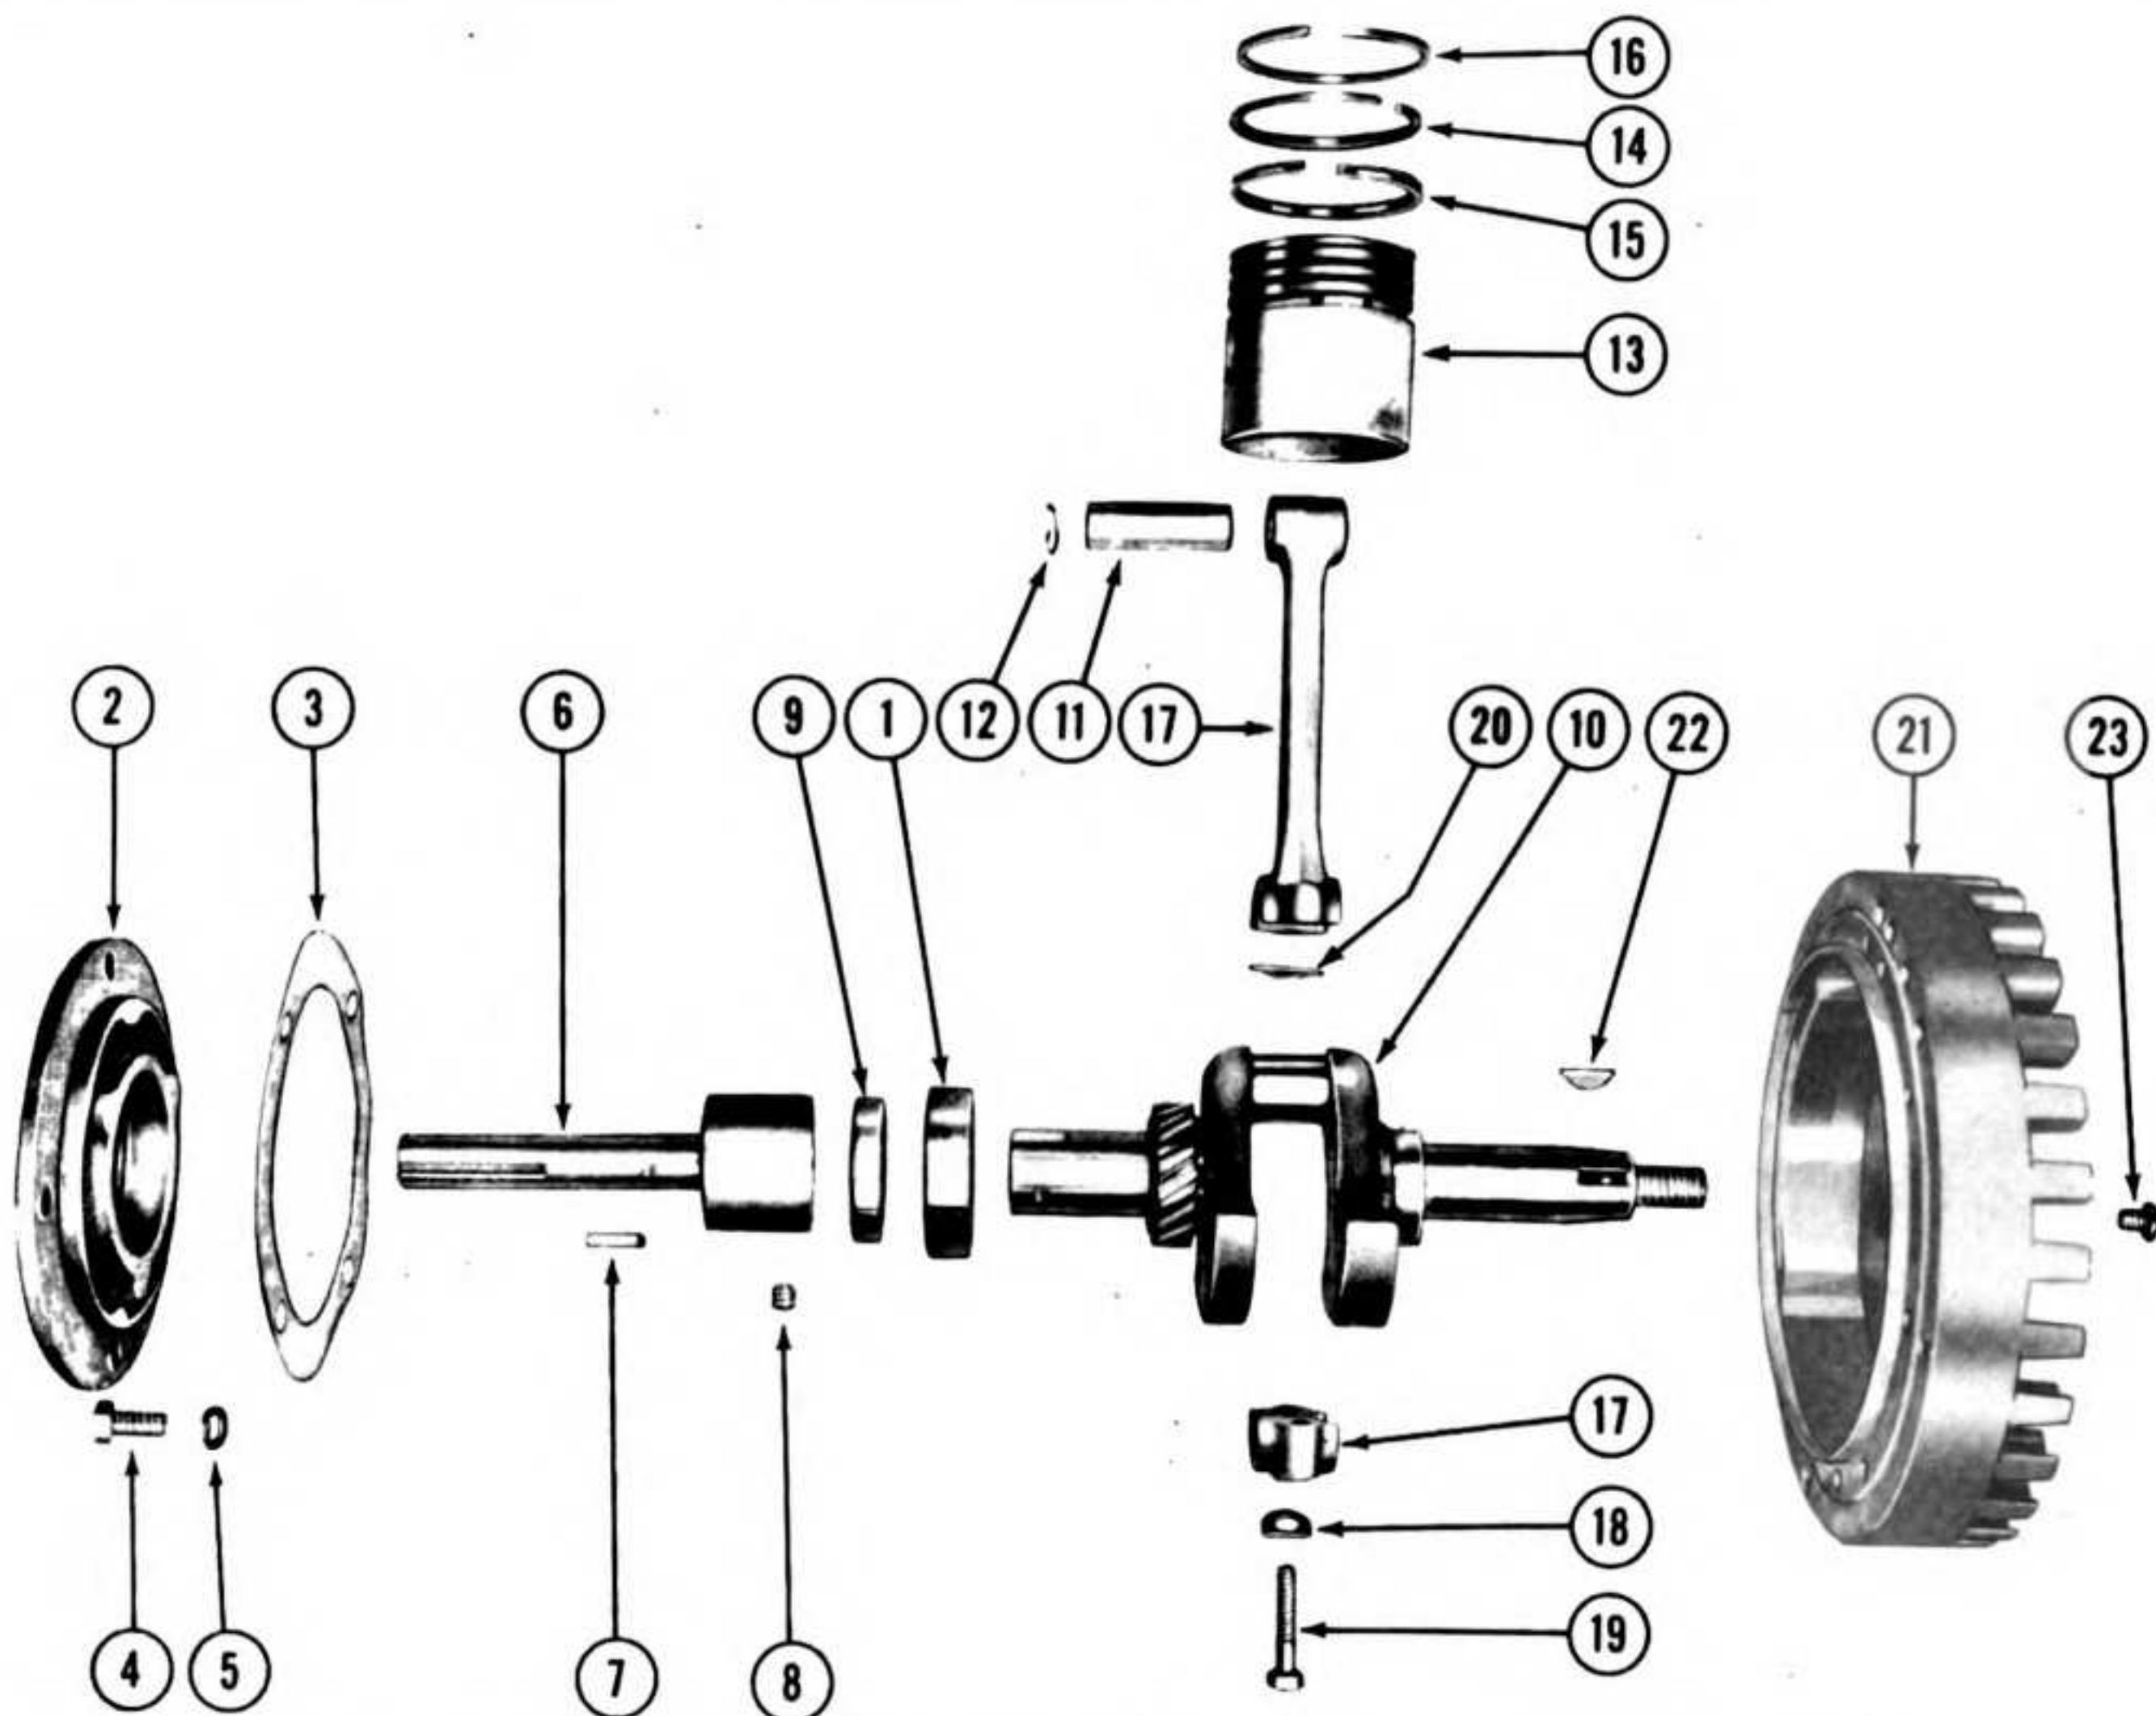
Exploded View of Crankshaft, Piston, Connecting Rod, and Flywheel
